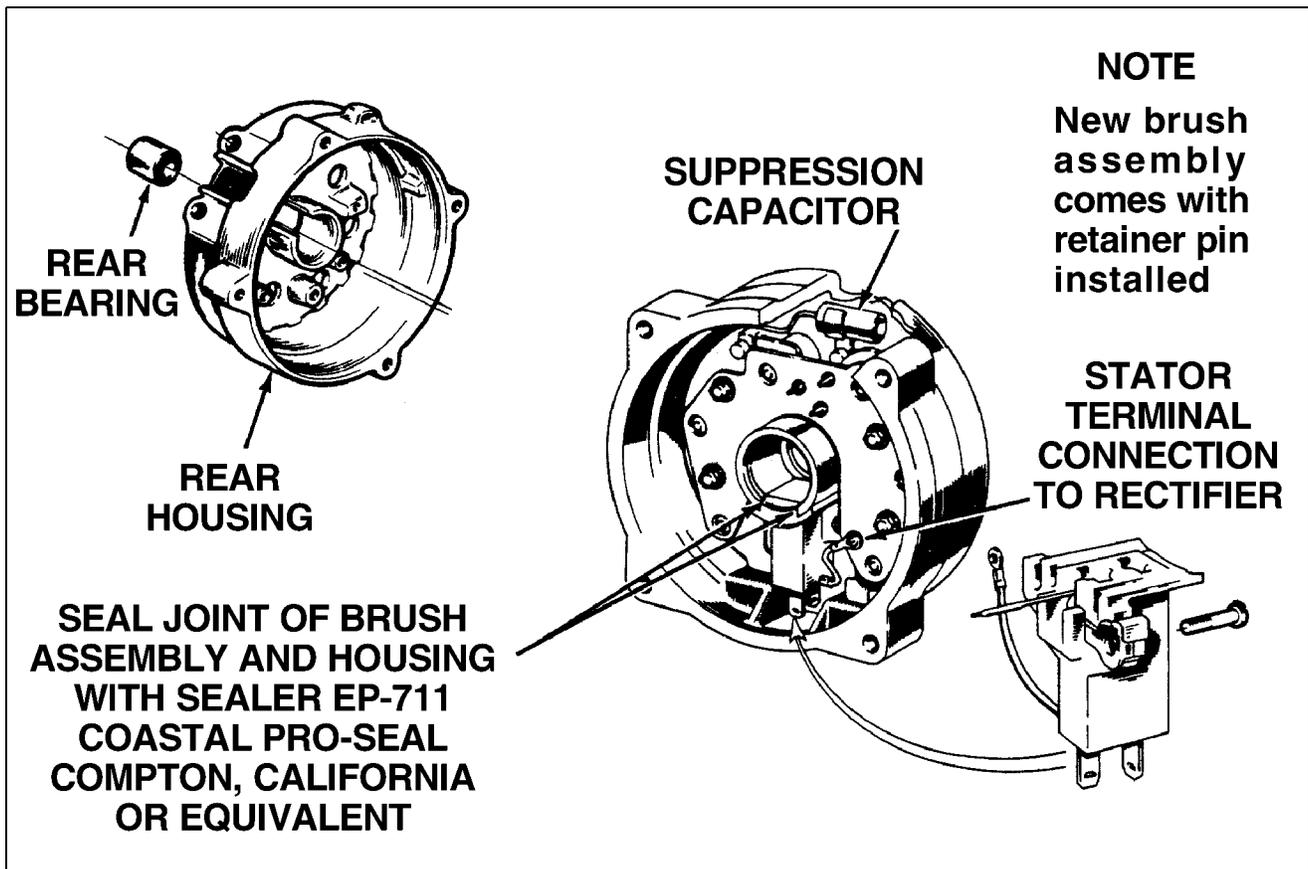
Rear Housing Bearing and Brush Assembly Installation
